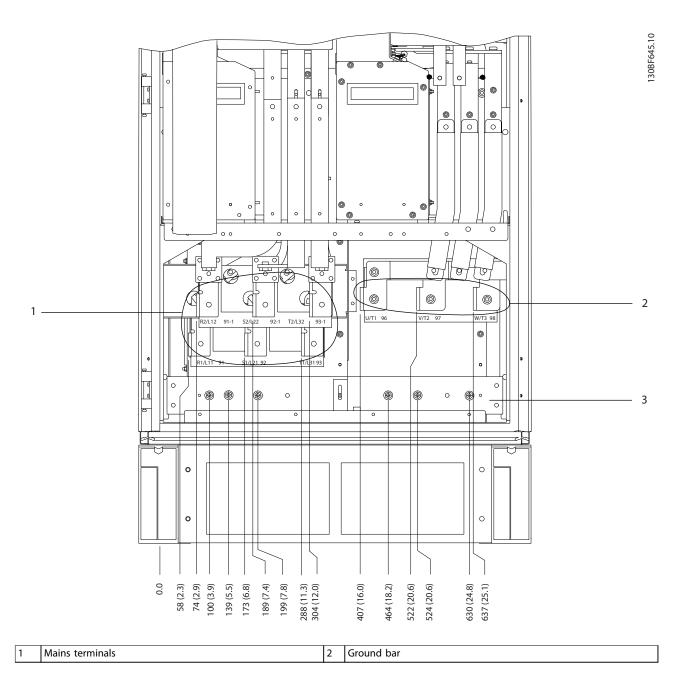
Terminal Dimensions for F10-F13 Rectifier Cabinet, Front View
